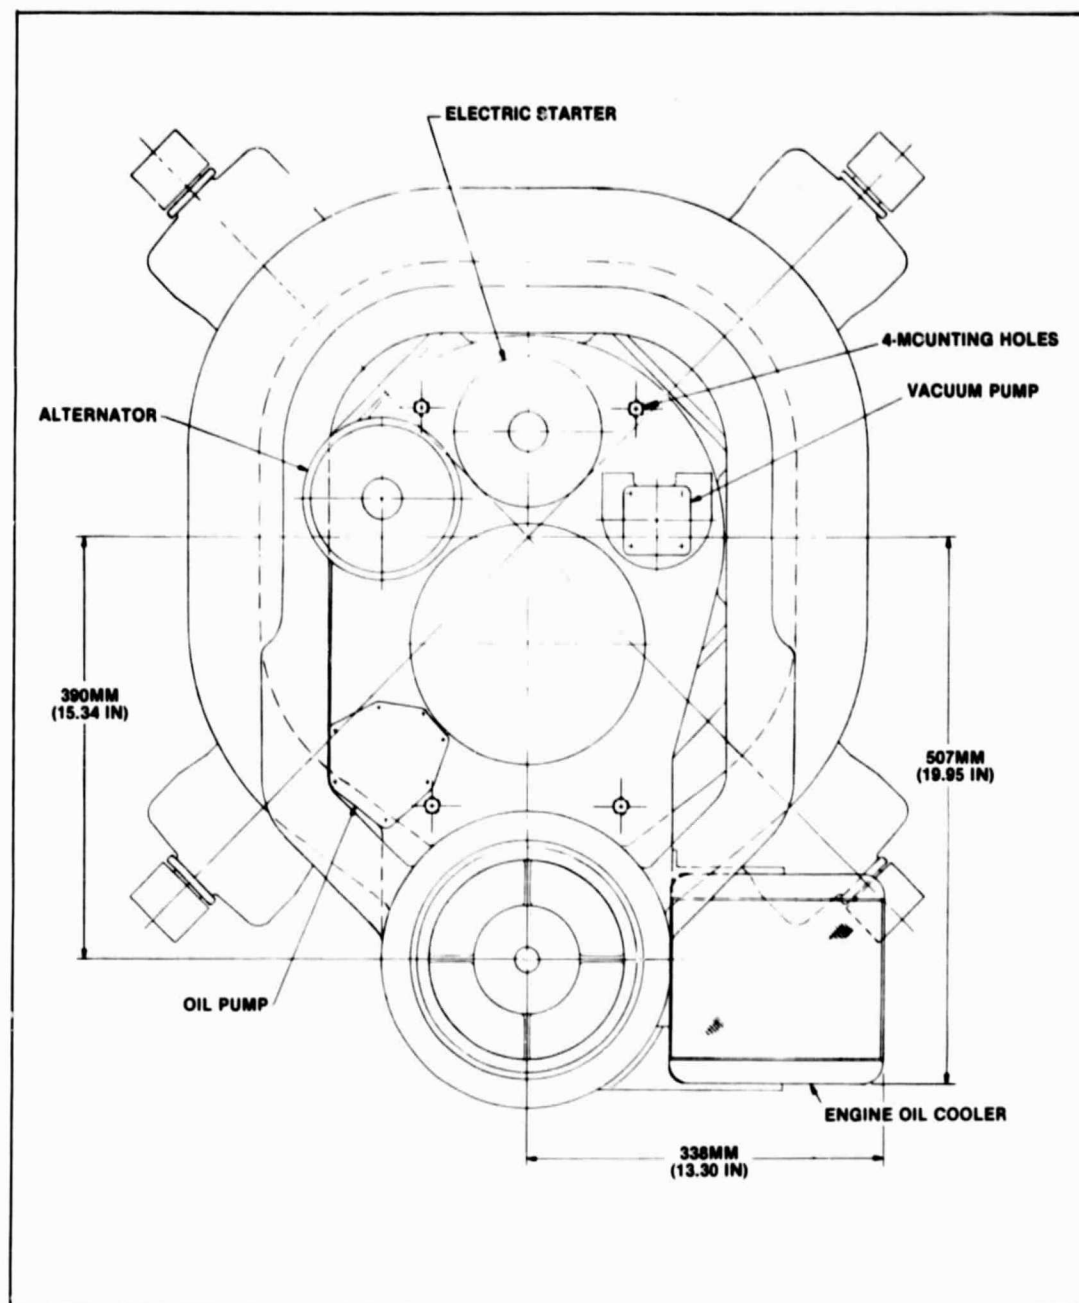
1491 kW COMMUTER AIRCRAFT DIESEL — REAR VIEW
